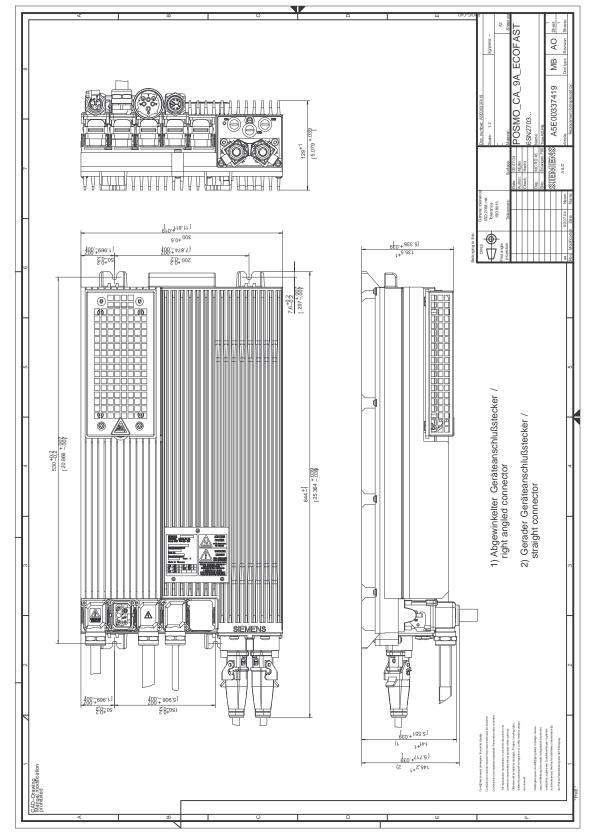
Dimension drawing POSMO CA 9 A ECOFAST
